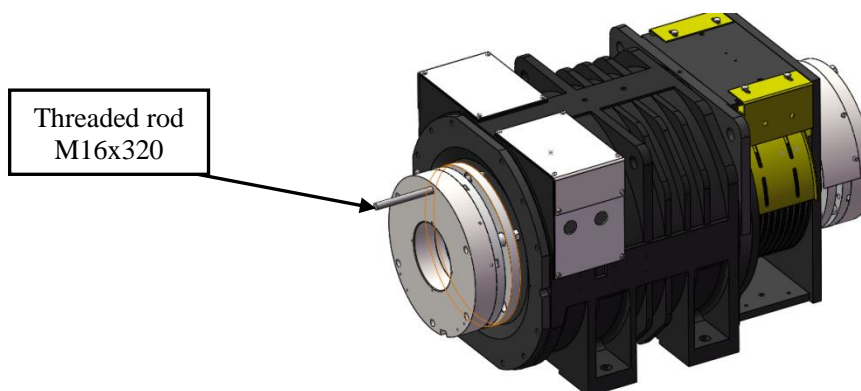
Install Threaded rod (TMGL2/TMGL2A)
